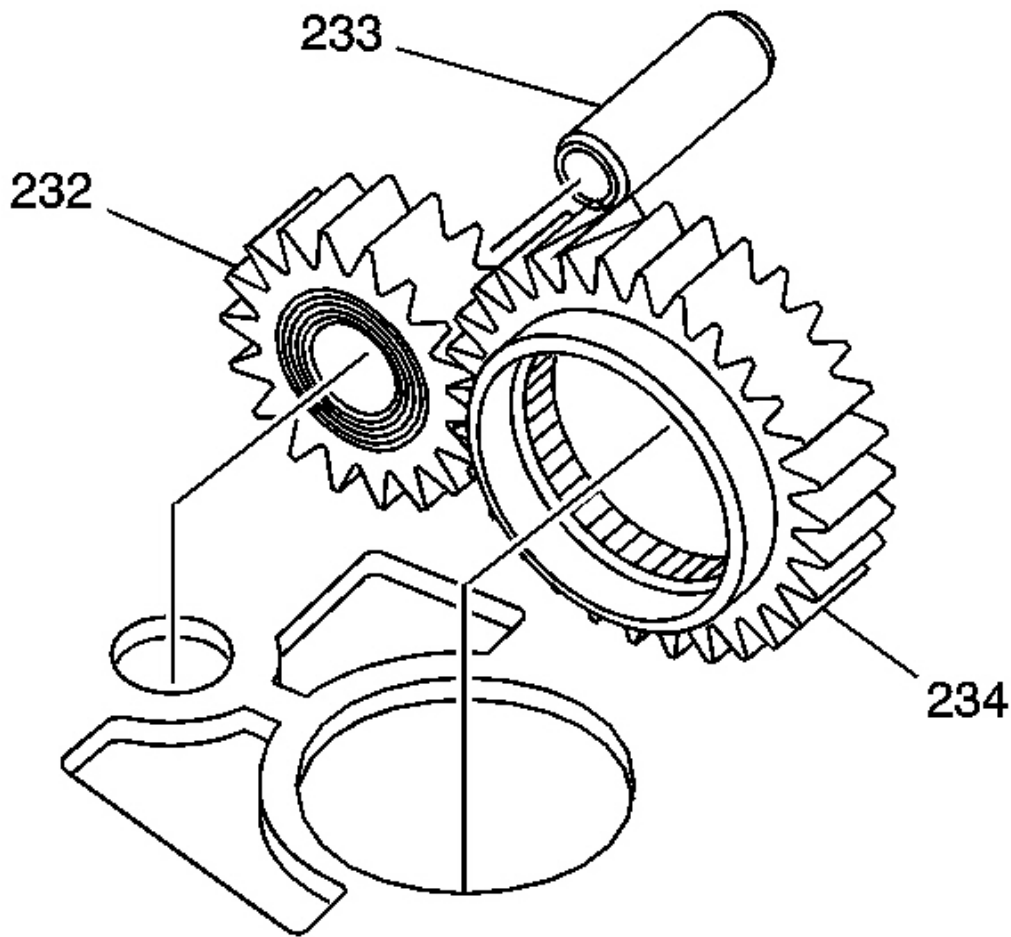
Automatic Transmission Fluid Pump Driven Gear, Drive Gear & Gear Pin
